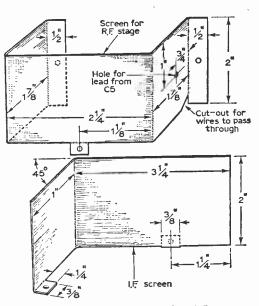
(top)—The dimensions of the R.F. screen. Fig. 12 (bottom)—The dimensions of the I.F. screen.
